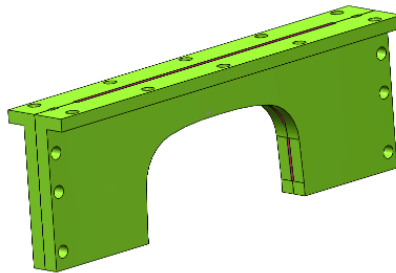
Three-dimensional schematic diagram of SP nozzle
